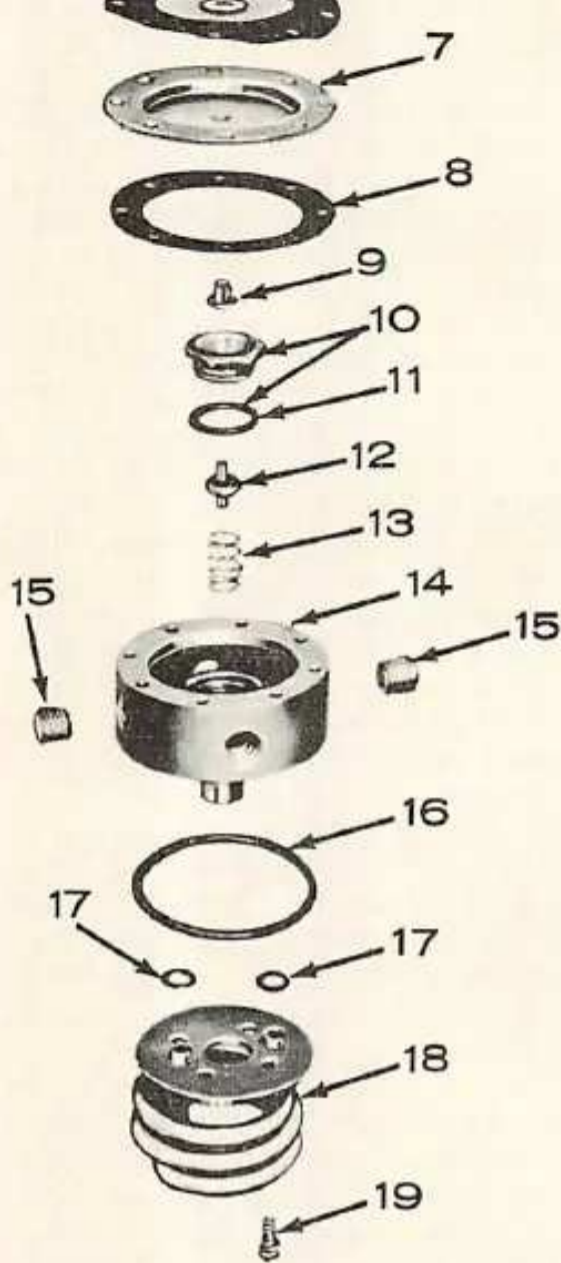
Exploded view of Zenith LP Gas vaporizer assembly.
